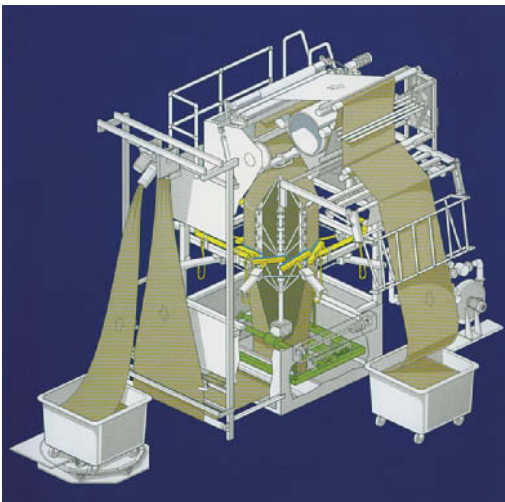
Circular singeing; technical drawing of Dornier singeing machine, type EcoSinge.
